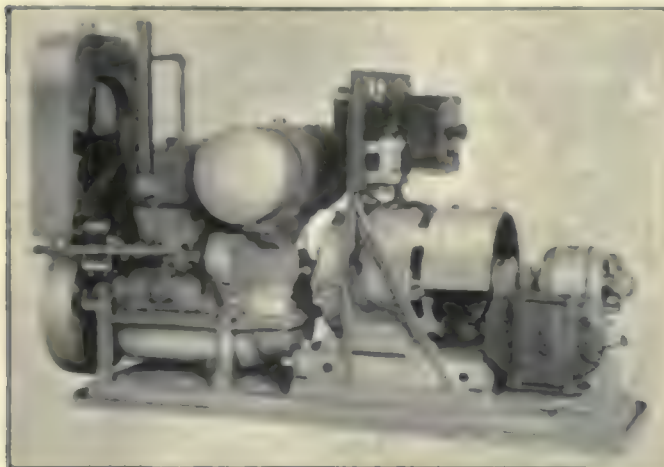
GEAR SHIFTING SIDE OF ROCKFORD MILLING MACHINE
